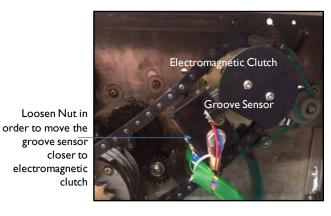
Incorrect position of groove sensor and electromagnetic clutch
